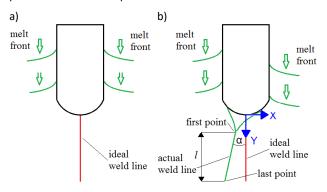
Formation of an ideal (a) and a possible actual (b) weld line
